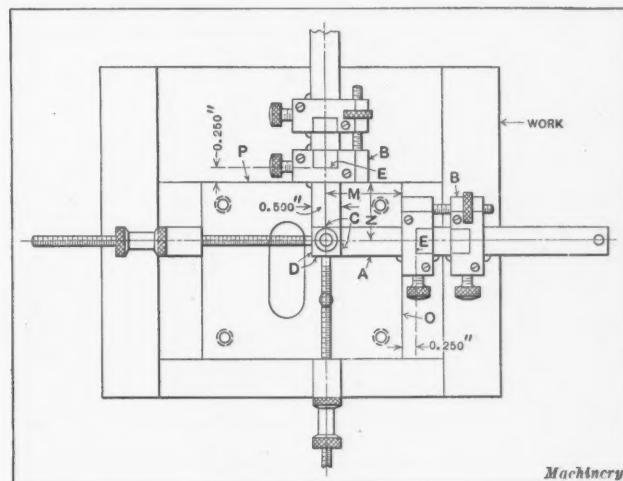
Diagram illustrating Method of using Laying-out Instrument shown in Fig. 1
